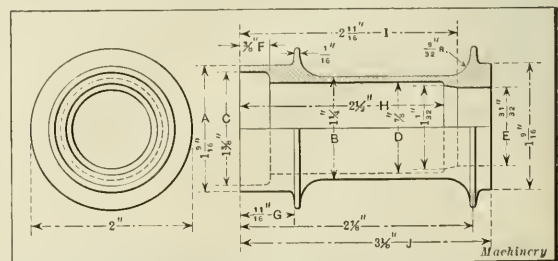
Bicycle Wheel Hub which can be successfully inspected by Method shown in Fig. 8
